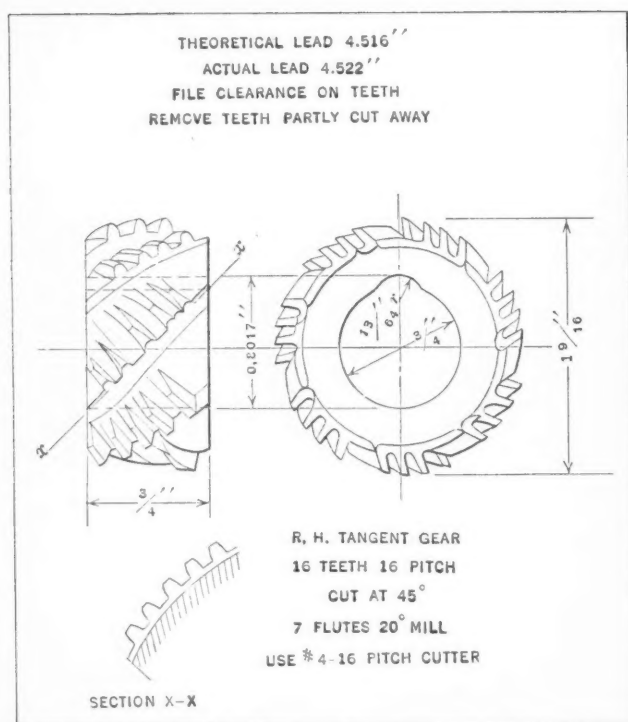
Hob Used in Cutting Teeth of Special Crown Gear
